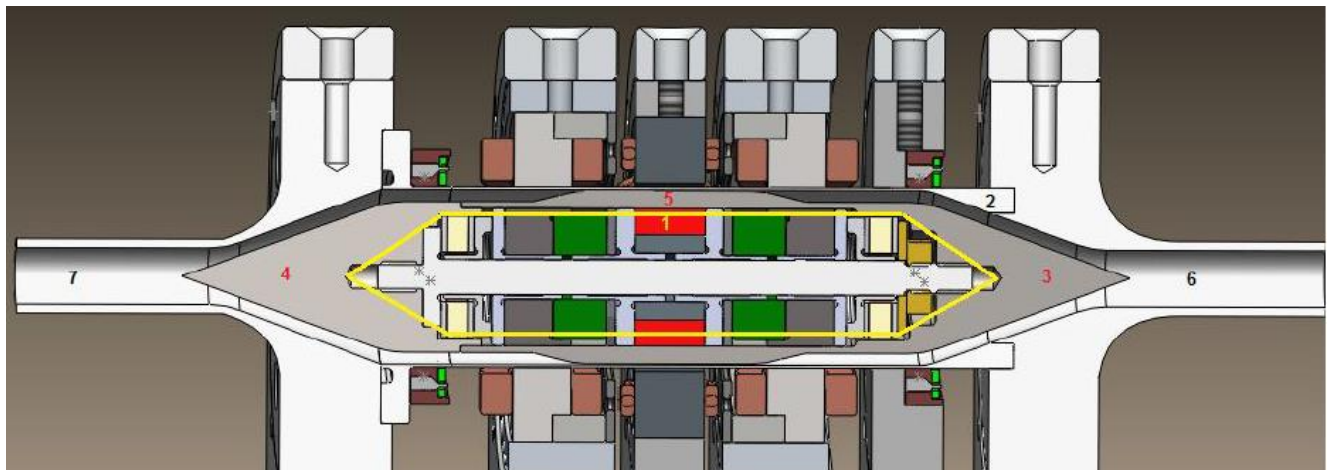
Cross-sectional view of full Mag-lev Shearing device 1 [2]
